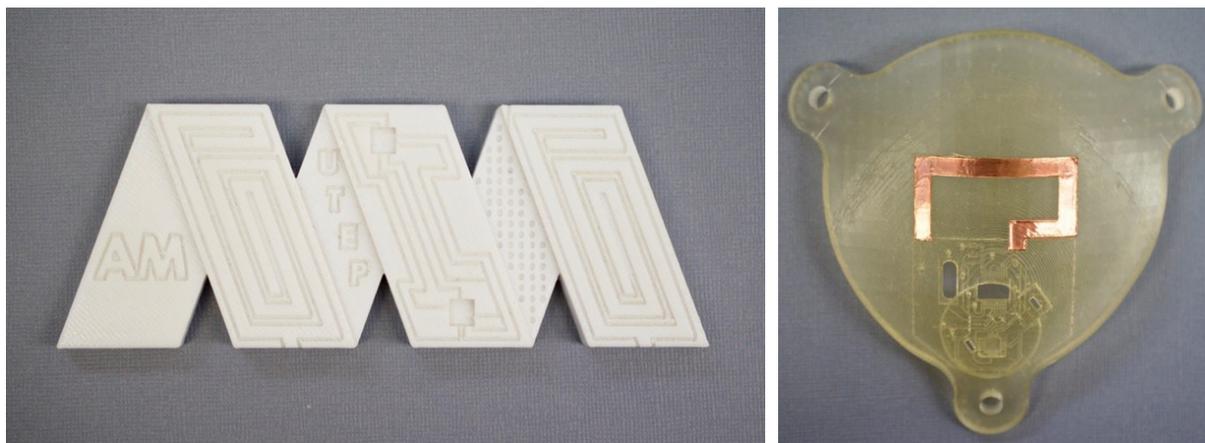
left) 3D printed part with machined paths, right) a part showing embedded foil and micromachined paths.
